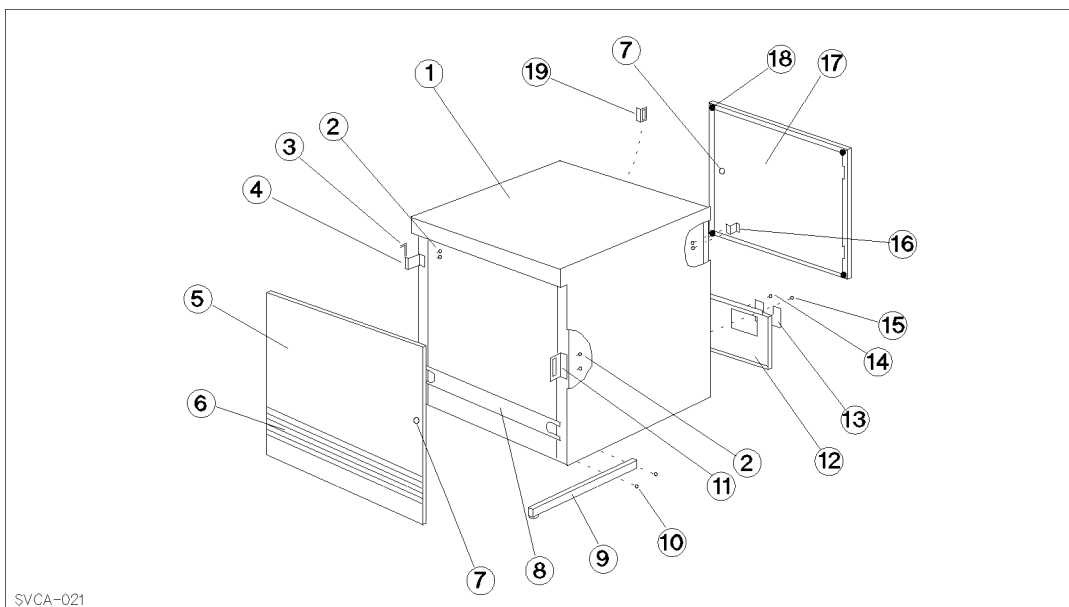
Small Cabinet (1000 mm height)—Exploded View
